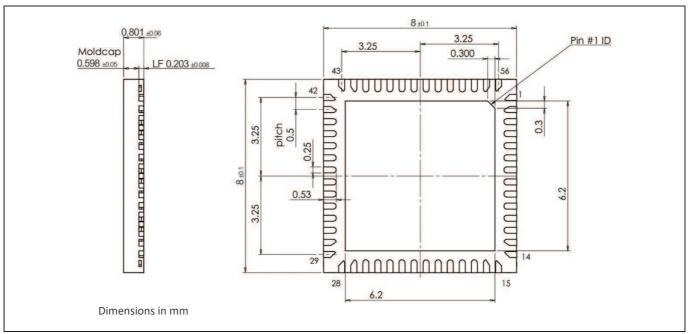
Outline Dimensions of QFN56, 0.5 mm Pitch, 8 mm × 8 mm
